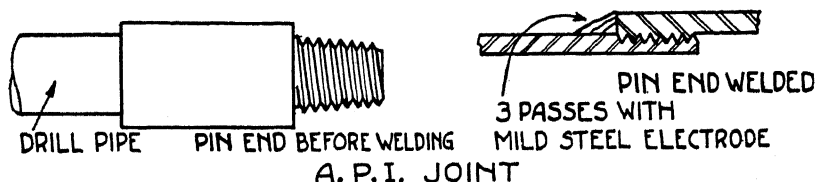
A.P.I. joint. Pin end. Before and after welding.
